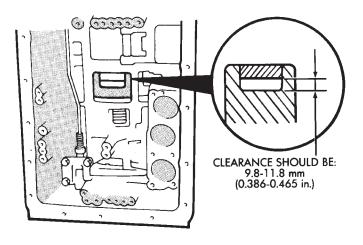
Installing Front Planetary And Forward-Direct Clutch Assembly
